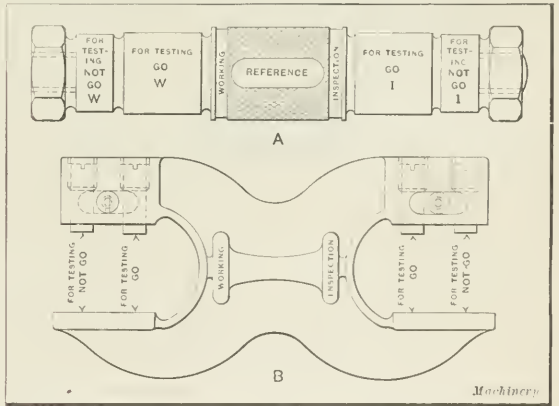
Reference Limit Gages used in testing Limit Working and Inspection Gages
